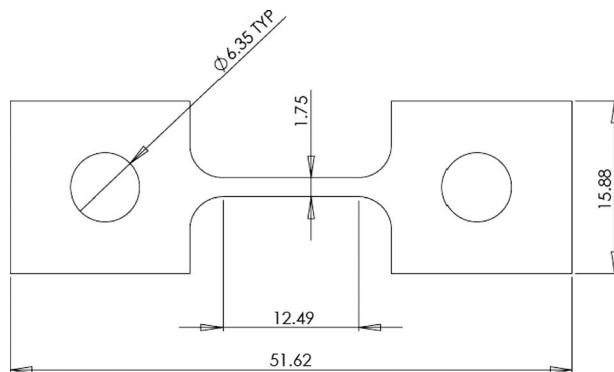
Minitensile specimen used to determine the properties of weld (all dimensions are in mm)
